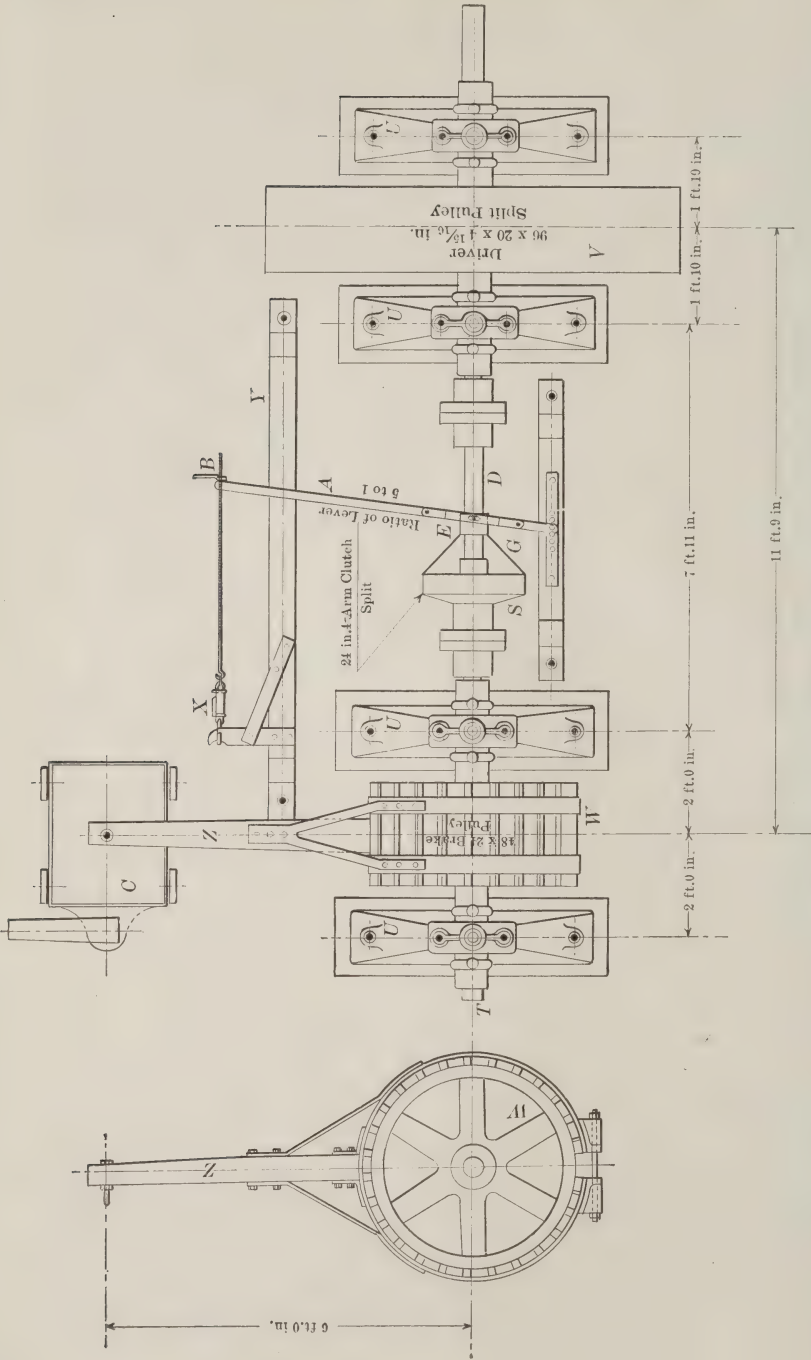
DYNAMIC CLUTCH-TESTING MACHINE
